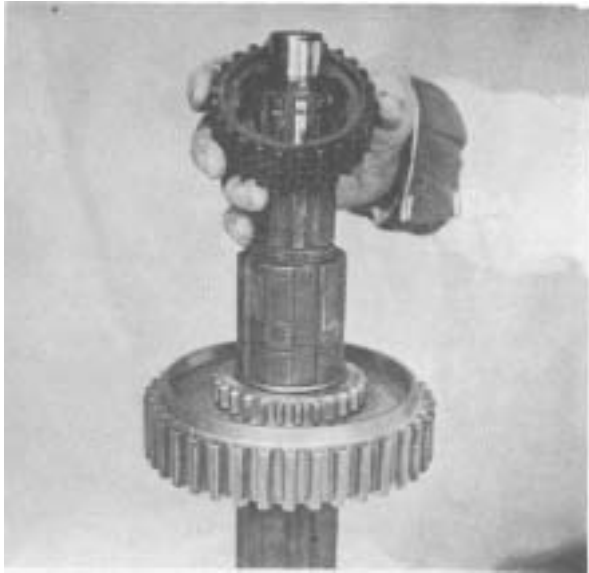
Install 2nd & 3rd shift hub sleeve and sleeve retainer ring.
